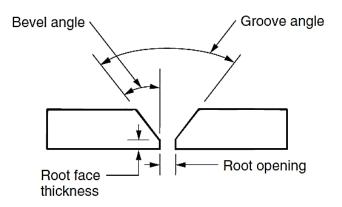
Bevel angle of double bevel butt weld [16]
